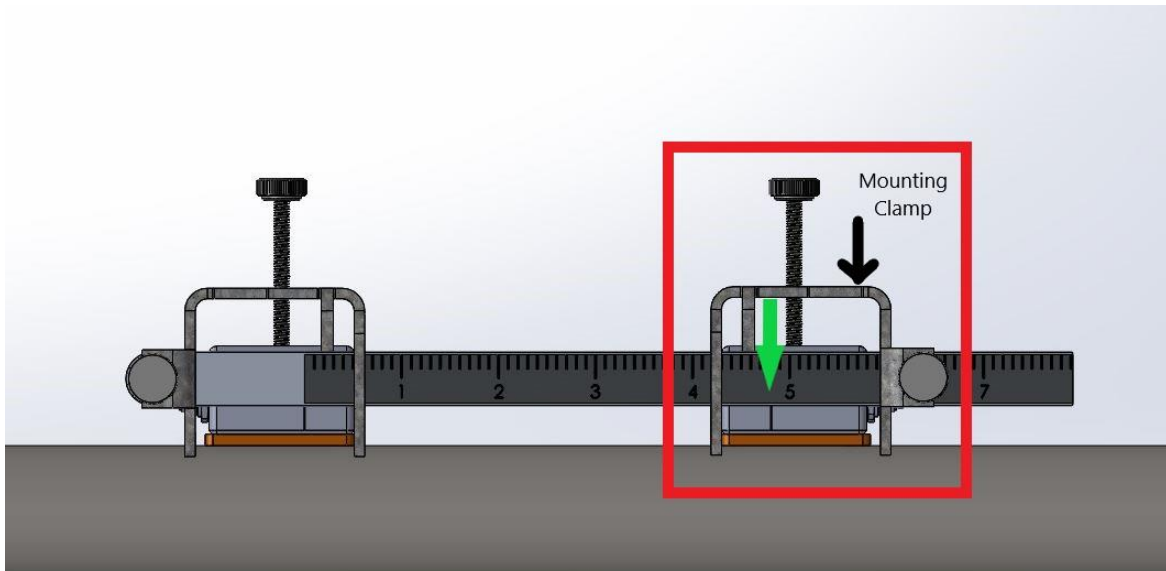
Spacing Locating Point on Small Rail/Fixture System
